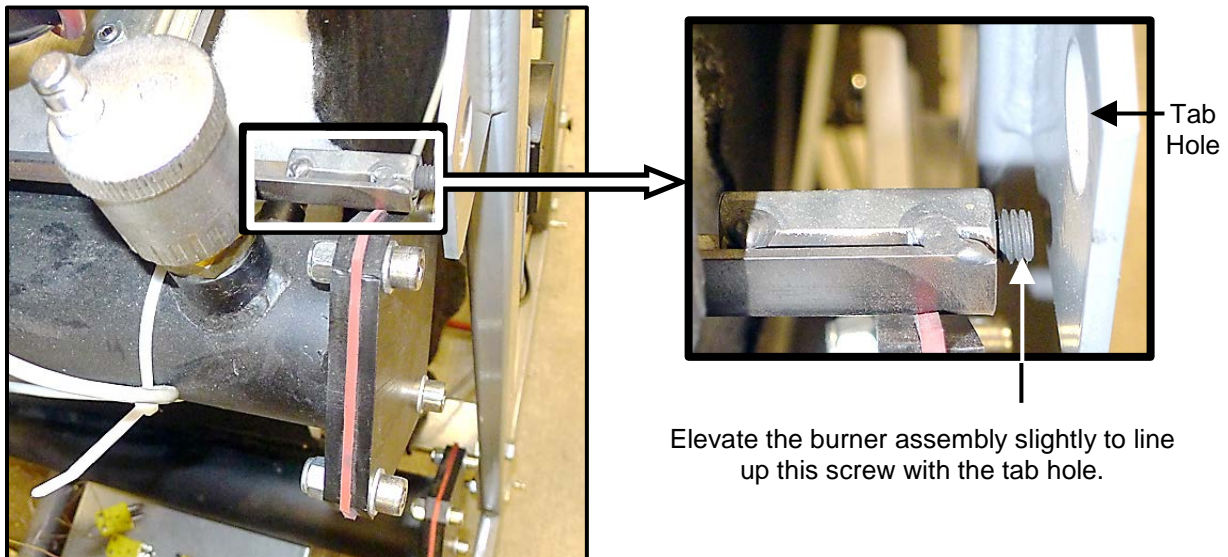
Removing the Gas Pipes from Gas Manifold (Step 8)
